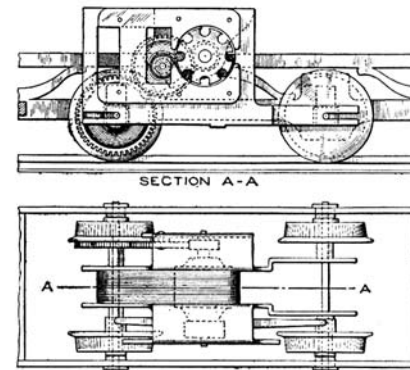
Installation of the Motor, Showing Gears and Switch Contact Spring
